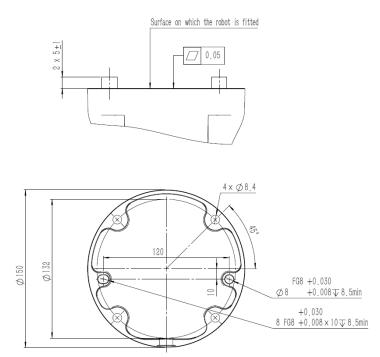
Mounting dimension drawing of the CS66 robot base, with unit of mm
